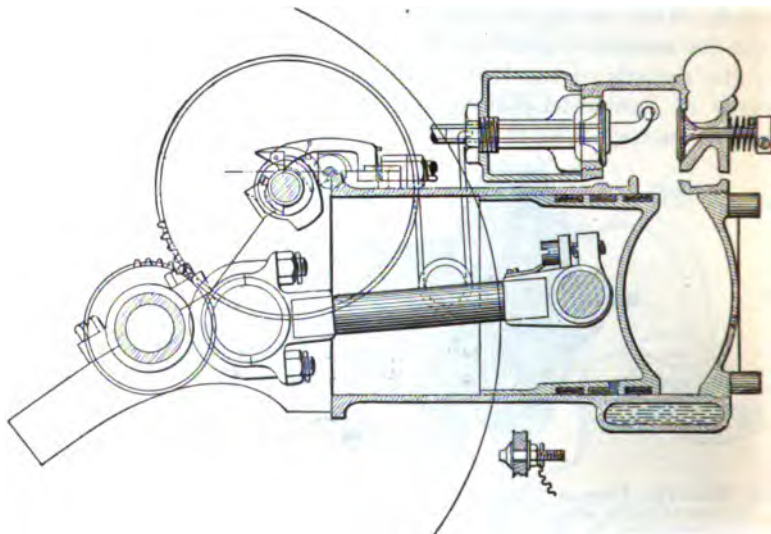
Sectional View through one Cylinder of the Duryea Carriage Motor, showing working parts. The exhaust cam operated by a two-to-one gear imparts a double motion to the valve pushrod; a lift for opening the valve, and a double twist for making and breaking the connections of the electrical spark. The valve and sparking chamber is projected so as to show the position of contained mechanism on a plane different from that of the cylinder section. Details of the insulated sparking anvil are shown below the cylinder. It is an iron contact point, having a mica washer on the inside and the outside of the cylinder walls, and a mica bushing between, so as to perfectly insulate it from the metal of the engine. A very short water jacket and the concave cylinder and piston heads are also exhibited in this figure.
